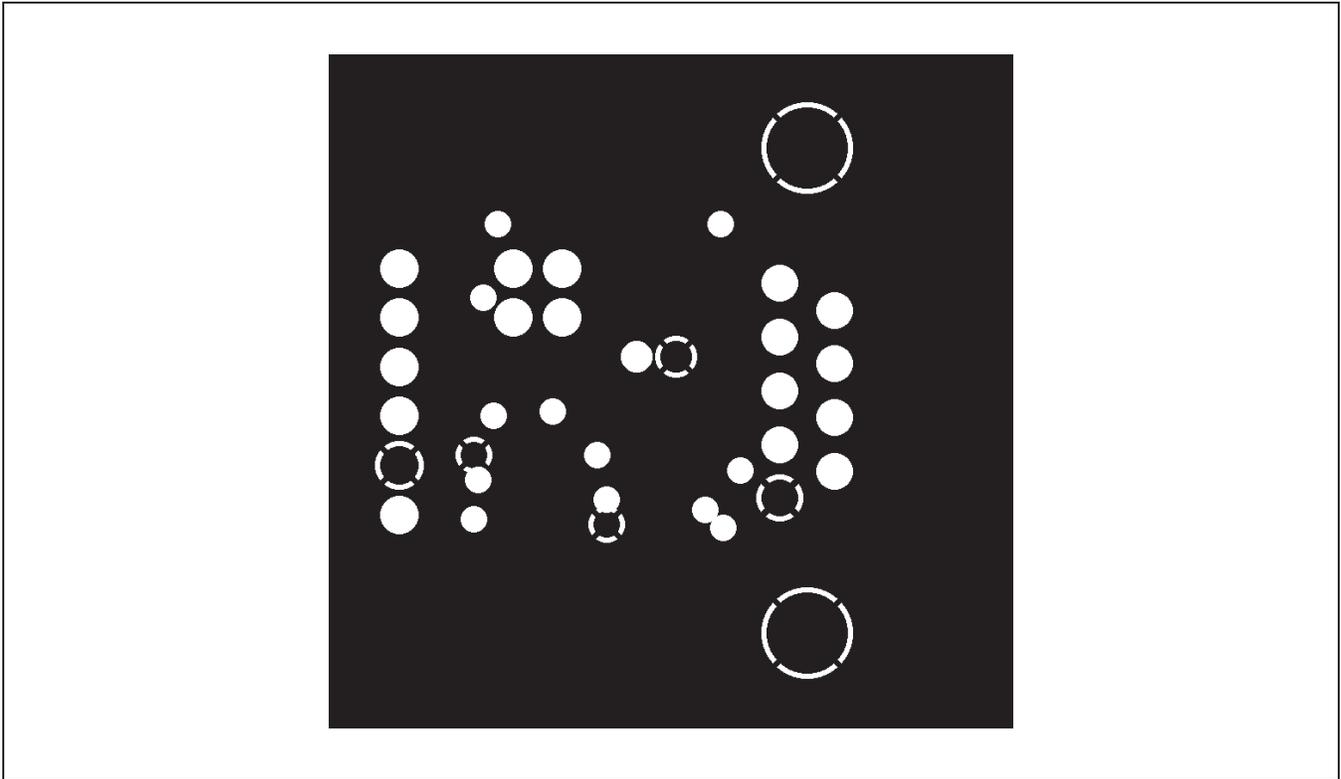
MAX3232PMB1 Peripheral Module PCB Layout—Inner Layer 1 (Power)
